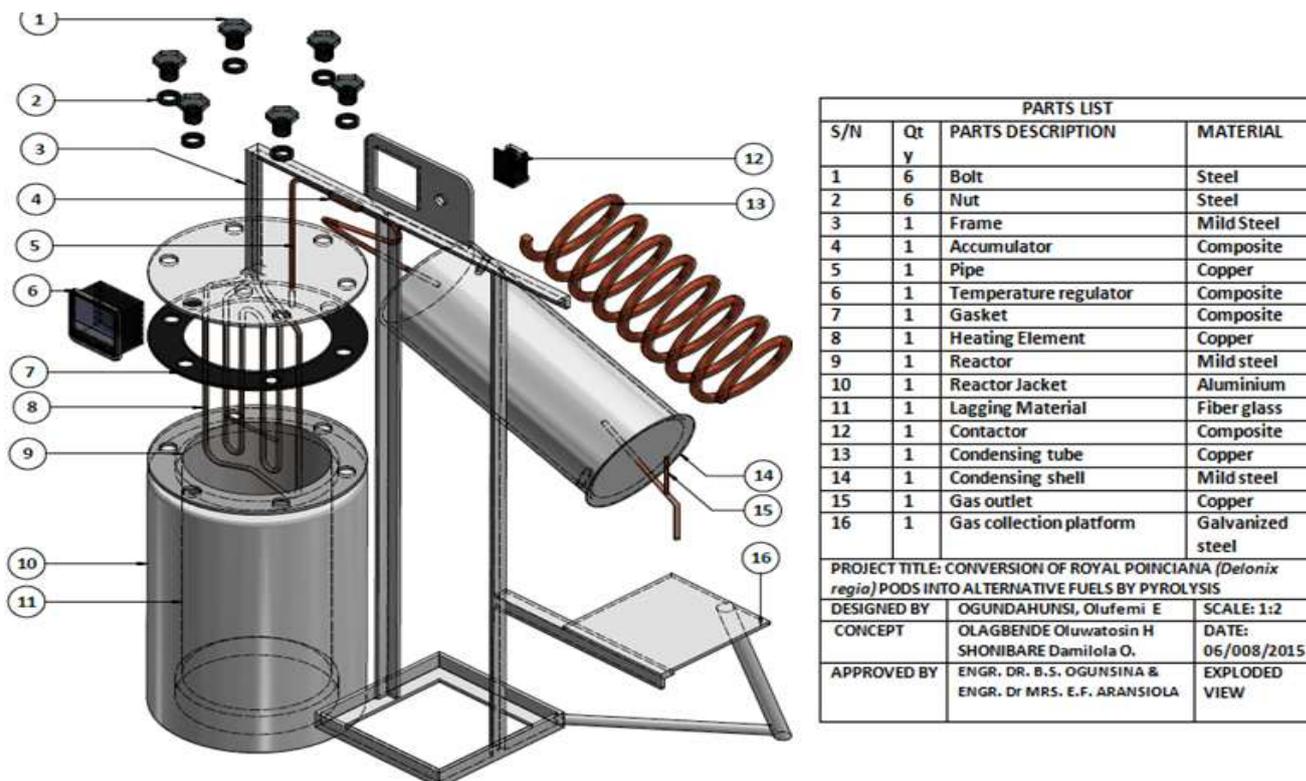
Exploded view and part list of the modified pyrolysis reactor
